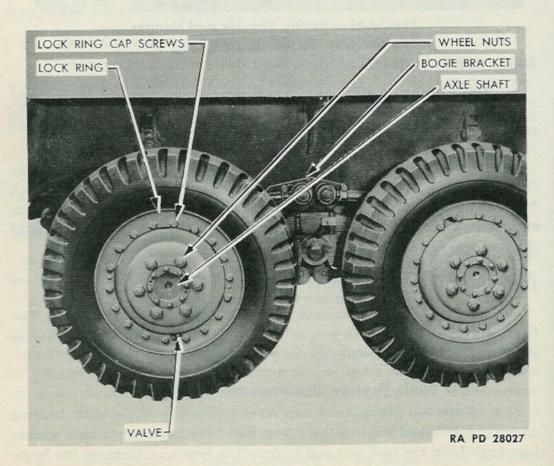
Rear and Intermediate Axles, Showing Wheels and Tires
